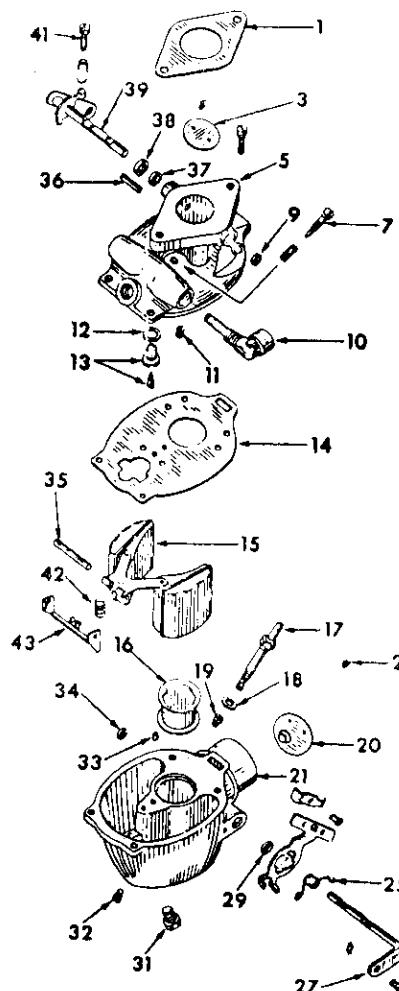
Exploded view of the Marvel-Schebler Model TSX896 carburetor used on Series 424, 444, 2424 and 2444 tractors.
